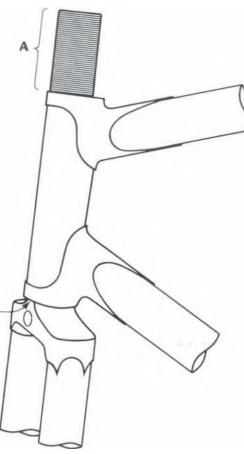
With the fork crown race seat against the bottom of the head tube, the length of steerer tube protruding from the top should be about 2mm less than A.
